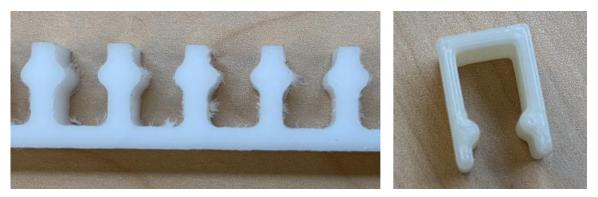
Part of a CNC machined strip of base parts (left) and a 3D printed switch (right)
